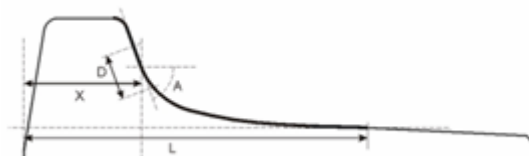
Wheel Condemn Gauge Drawing - Flange Back Wear indication
